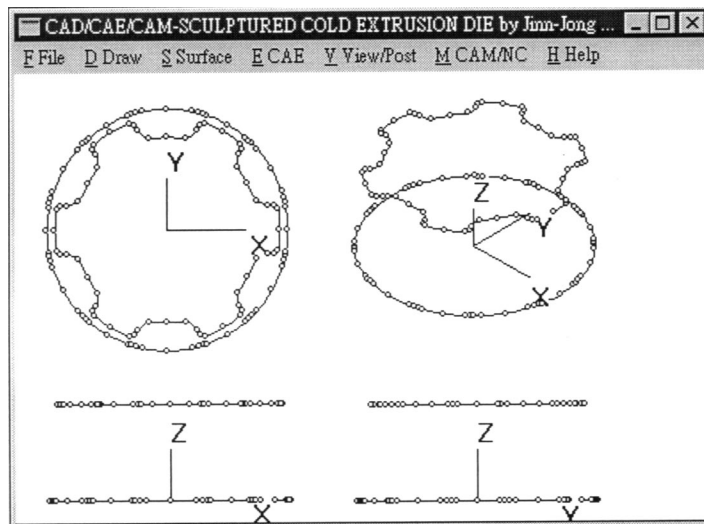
The product and the billet profiles and the fitting points of a gear spline.
